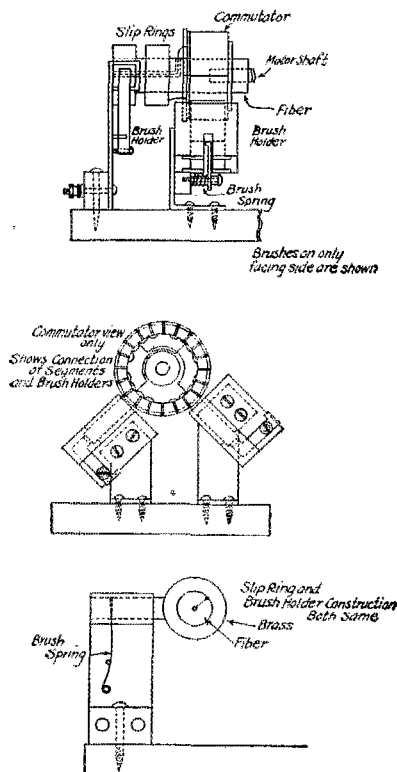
CONSTRUCTIONAL DETAILS OF THE COMMUTATING ARRANGEMENT
